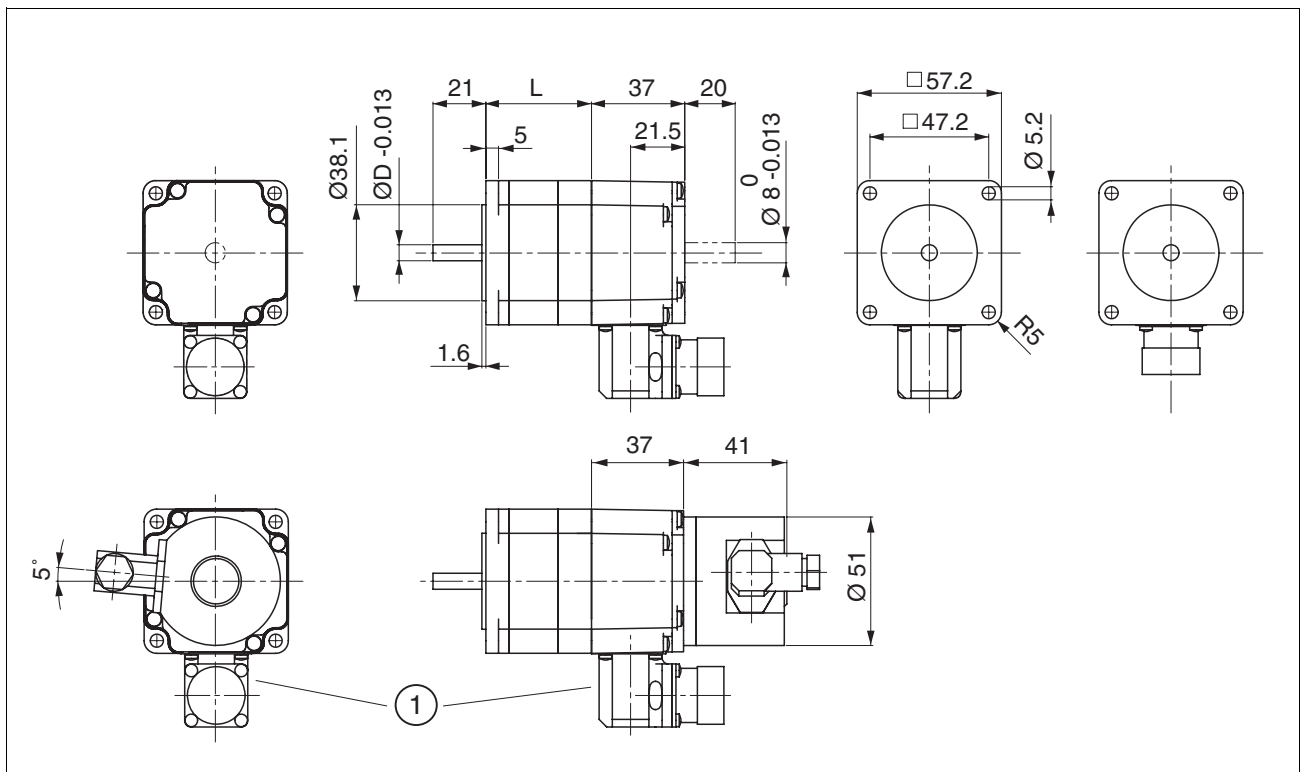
BRS36 dimensional drawing connector version without encoder
